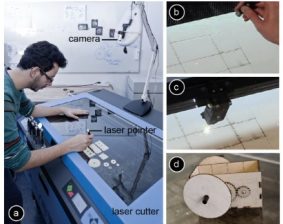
(a) *Constructable* users interact by drafting directly on the workpiece with hand-held lasers. (b) Here the user sketches a finger joint across two objects (c) The system responds by cutting the desired joint using the cutting laser. (d) *Constructable* allows creating precise & functional mechanical objects, such as this simple motorized vehicle.
